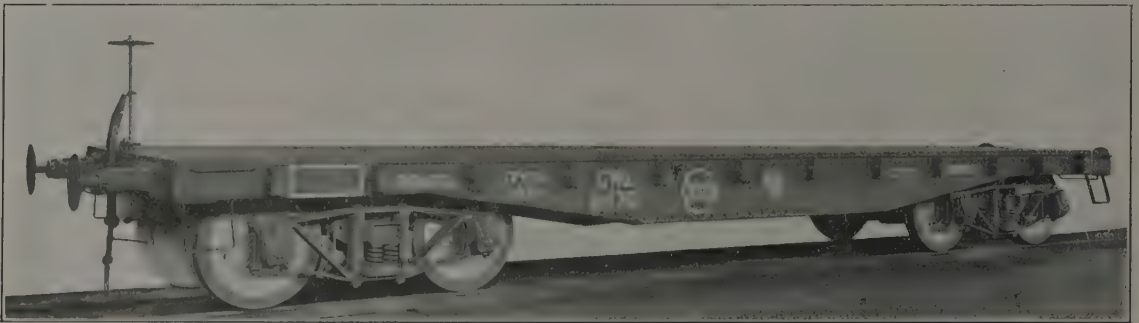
Steel Underframe 50-Metric Ton Flat Car for the Russian Government Railways. Weight, 40,800 lb.; Length Over Floor, 40 ft.; Width Over Floor, 8 ft. 11½ in. Builder, Pressed Steel Car Company.
